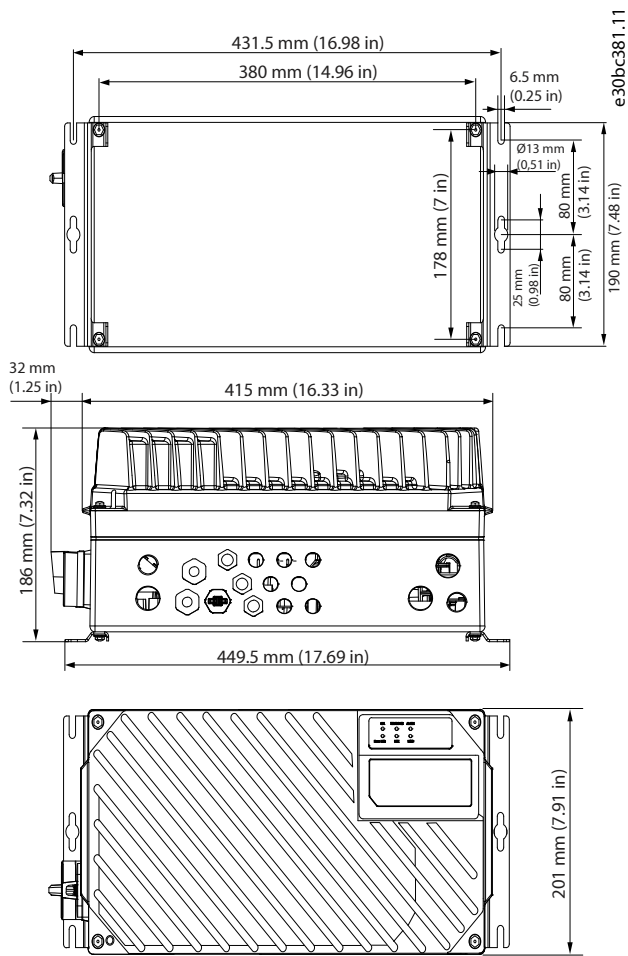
Dimensions VLT® Decentral Drive FCD 302 Large Unit
